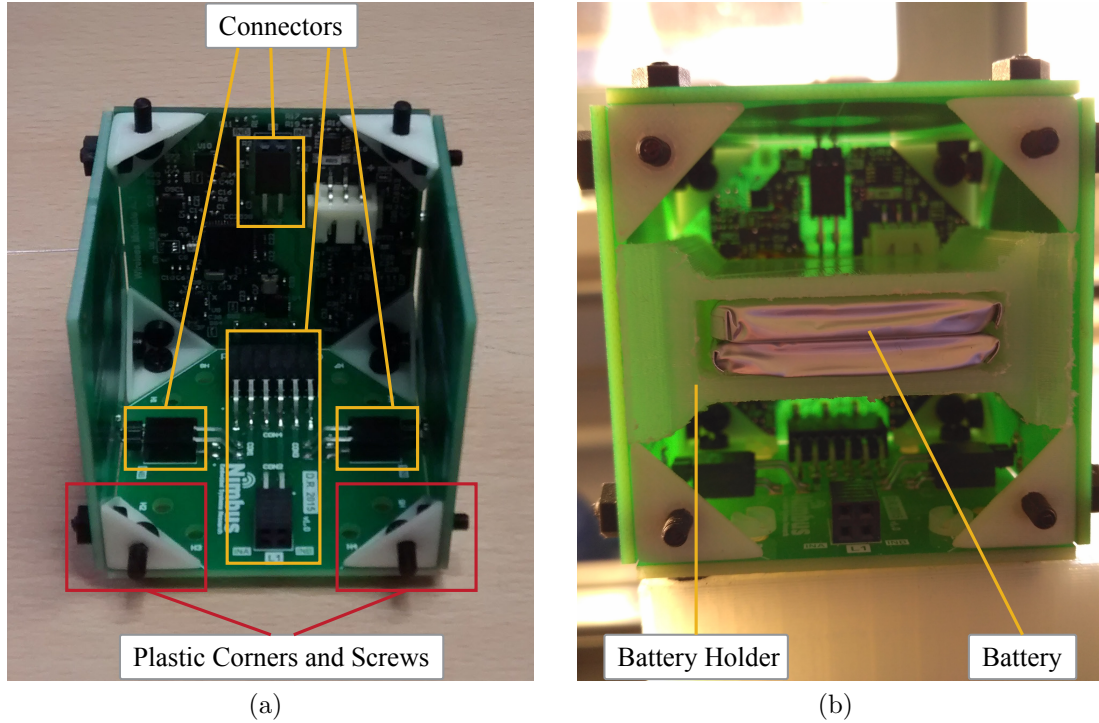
(a) Module assembly with connectors, plastic corners and screws (b) Battery assembly inside the cube.
